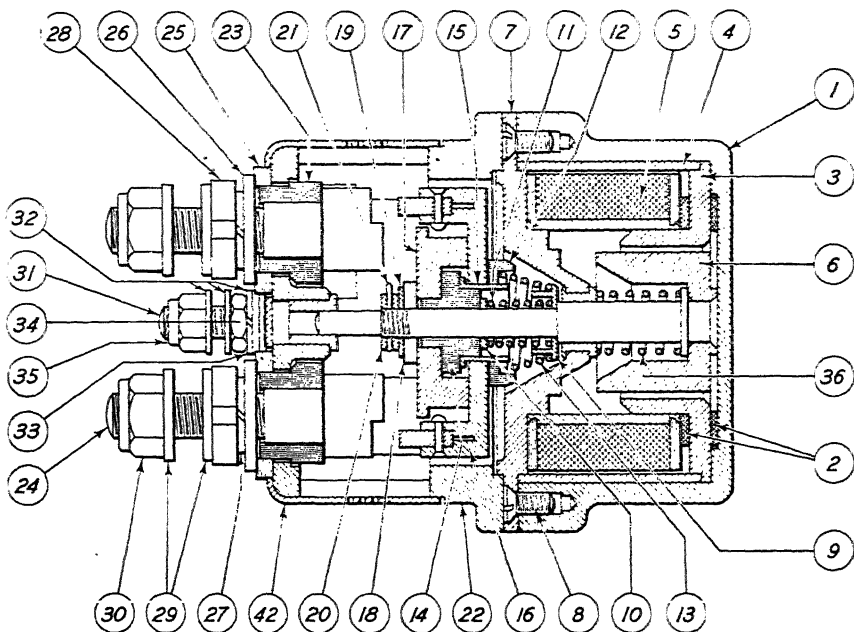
SECTIONAL VIEW OF B.T.H. SOLENOID SWITCH TYPE 04B-1.
